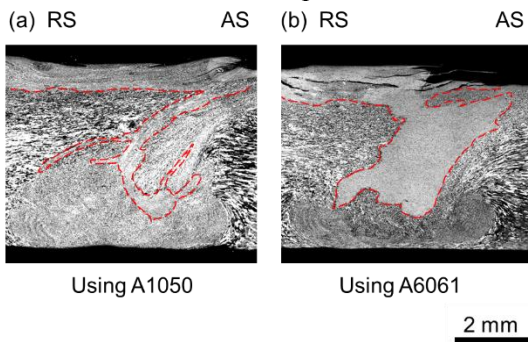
Macrostructures of welded joint with (a) A1050 and (b) A6061 build-up materials.
